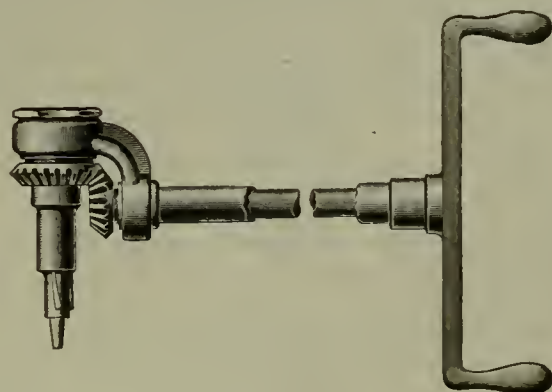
PHOENIX TUBE EXPANDER; GEARED TYPE.
